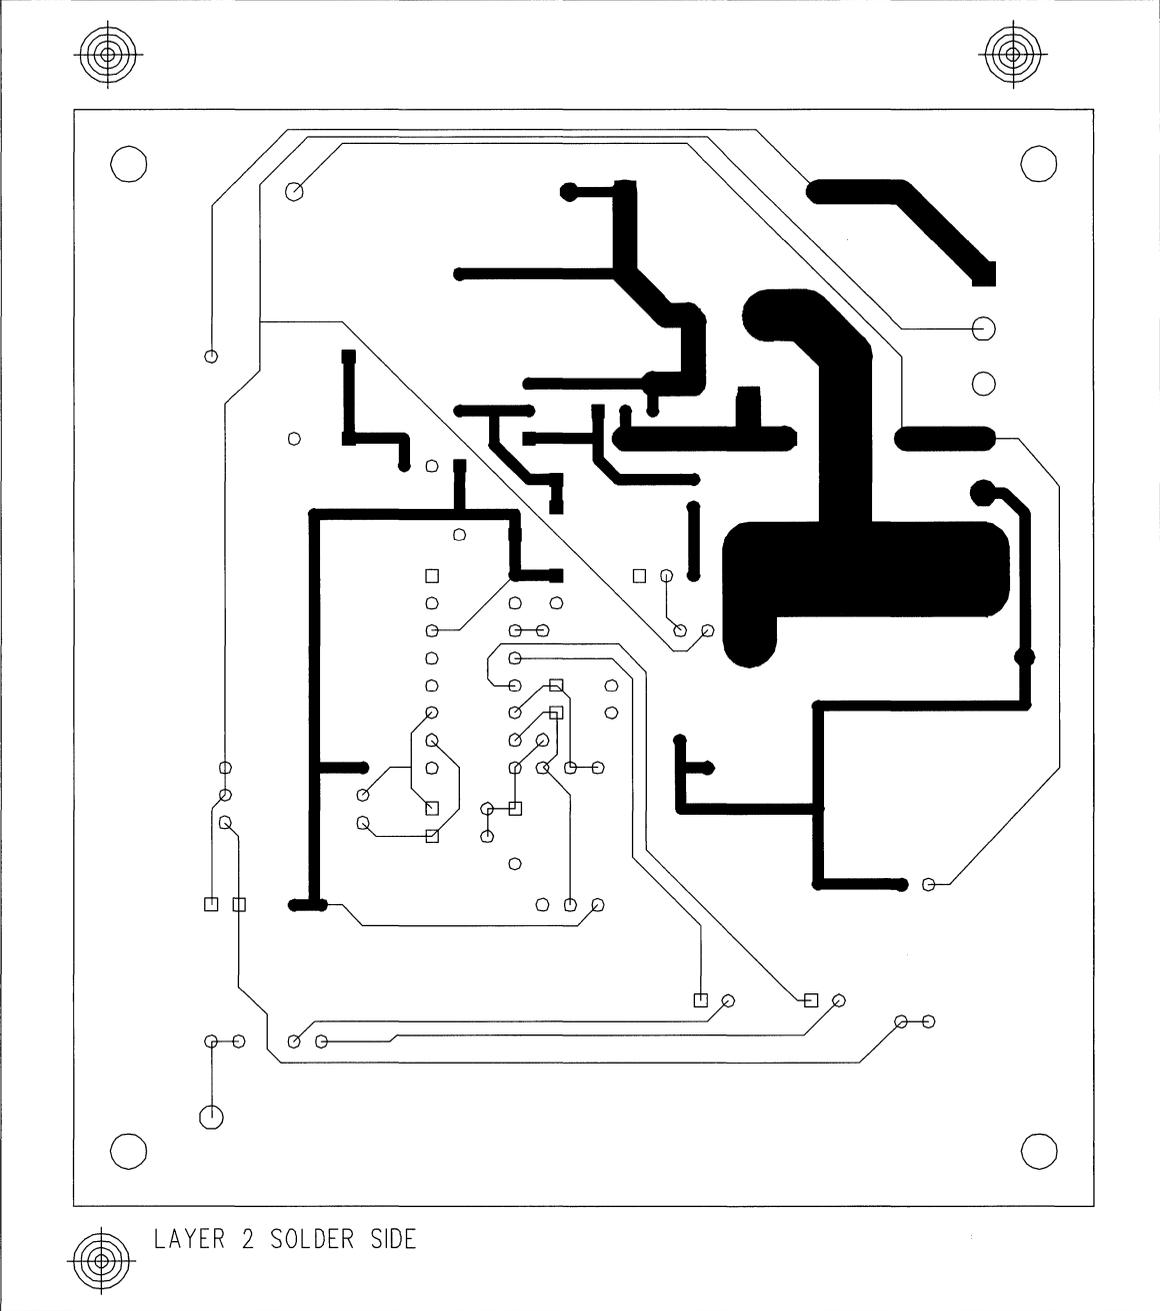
P-Channel MOSFET Switching Charger—Solder Side
